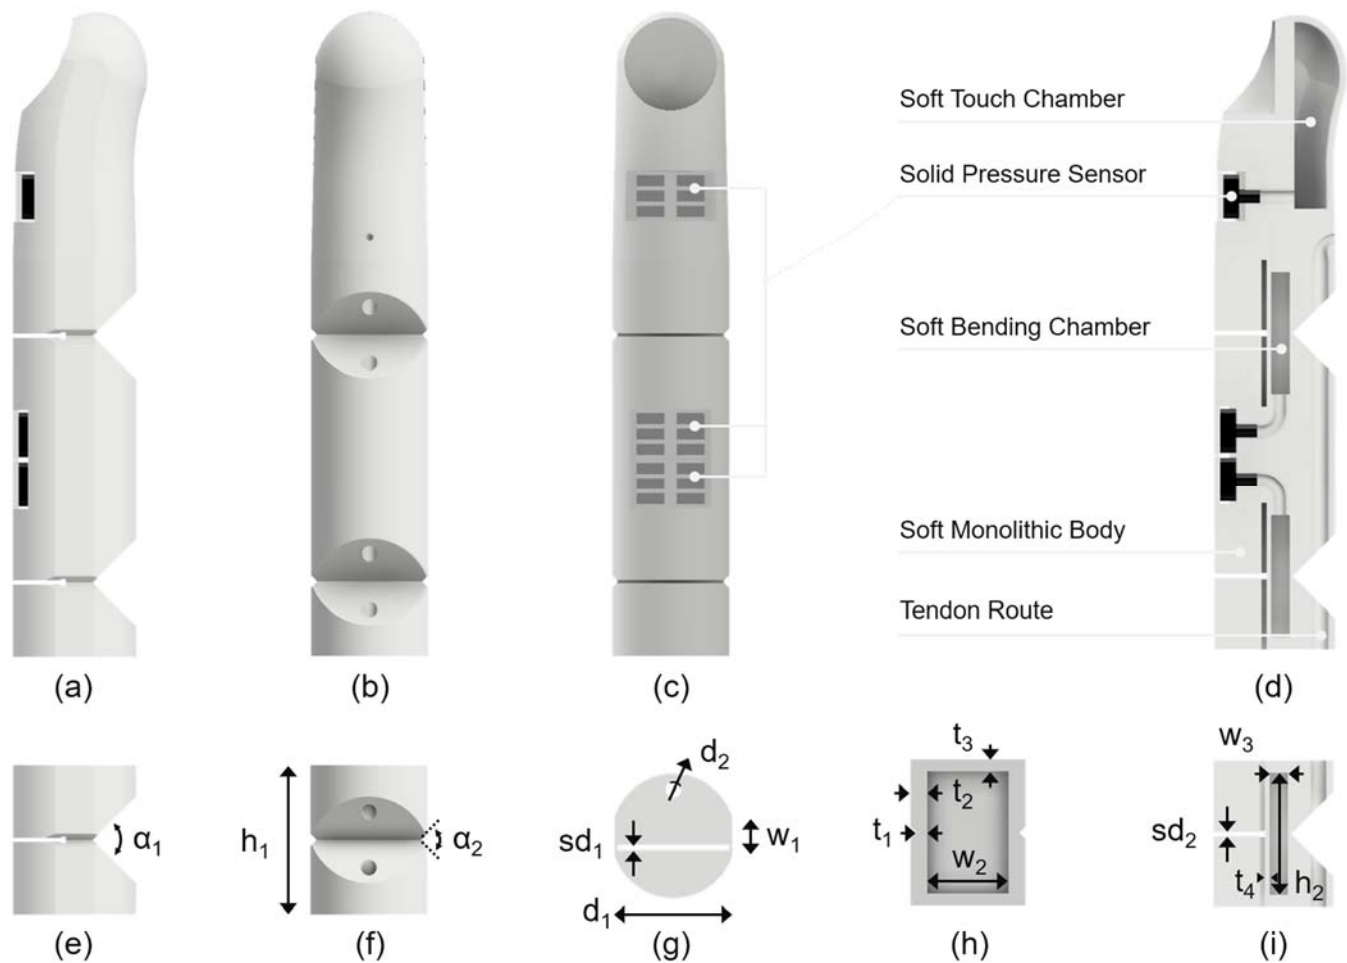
3D printed soft monolithic robotic finger with self-sensing pneumatic chambers (a) side view, (b) front view, (c) back view and (d) cross-sectional view. A single self-sensing hinge (e) side view, (f) front view, (g) top view, (h) back view cross-sectional view and (i) side view cross-sectional view. Dimensions: α_1 : 90° , α_2 : 90° , h_1 : 24.0, h_2 : 20.0, sd_1 : 0.80, sd_2 : 0.60, d_1 : 20.0, d_2 : 2.50, w_1 : 6.24, w_2 : 13.40, w_3 : 3.0, t_1 : 1.80, t_2 : 2.80, t_3 : 2.0, t_4 : 0.80. The thickness of the touch chamber thin wall is 1.20. All dimensions are in mm.
